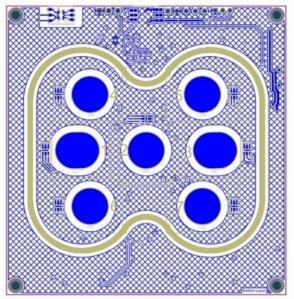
ICT-040X-04A PCB (Bottom Layer)
